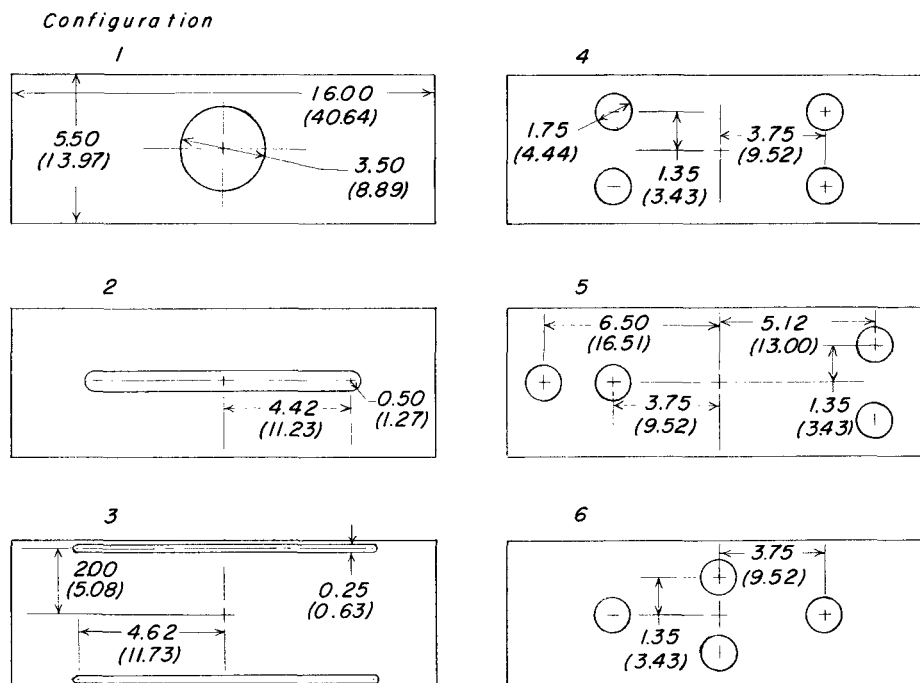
Details of nozzle geometry in each removable jet configuration plate. All dimensions are in inches (centimeters).
